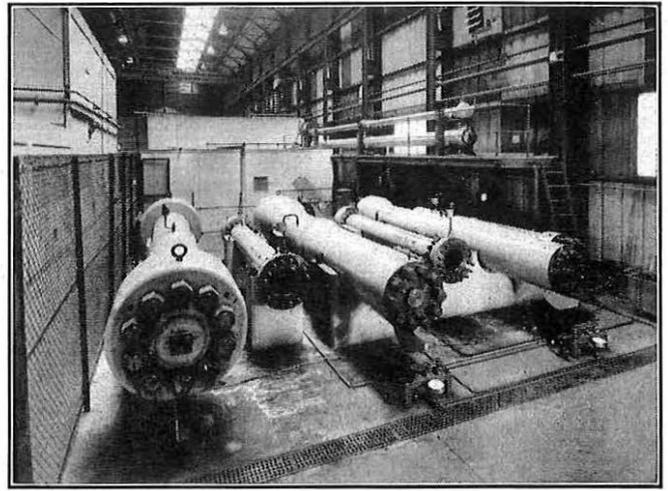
PRESSURE-TESTING EQUIPMENT.
